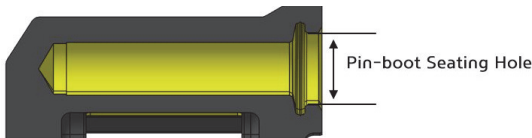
Rattle noise improvement sample : reducing pin-boot seating hole diameter
